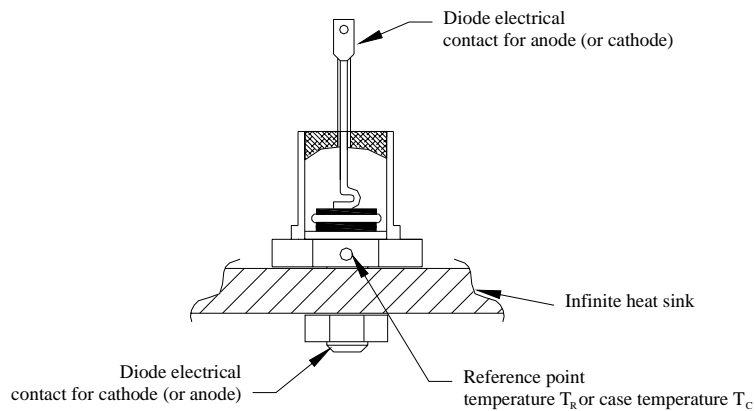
Case mounting arrangement. (stud packages).
